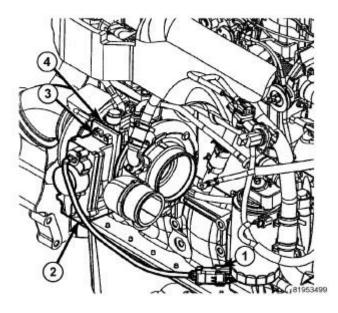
Electrical Connector, Turbocharger Actuator, Mounting Bolts & Turbocharger Courtesy of CHRYSLER GROUP, LLC
